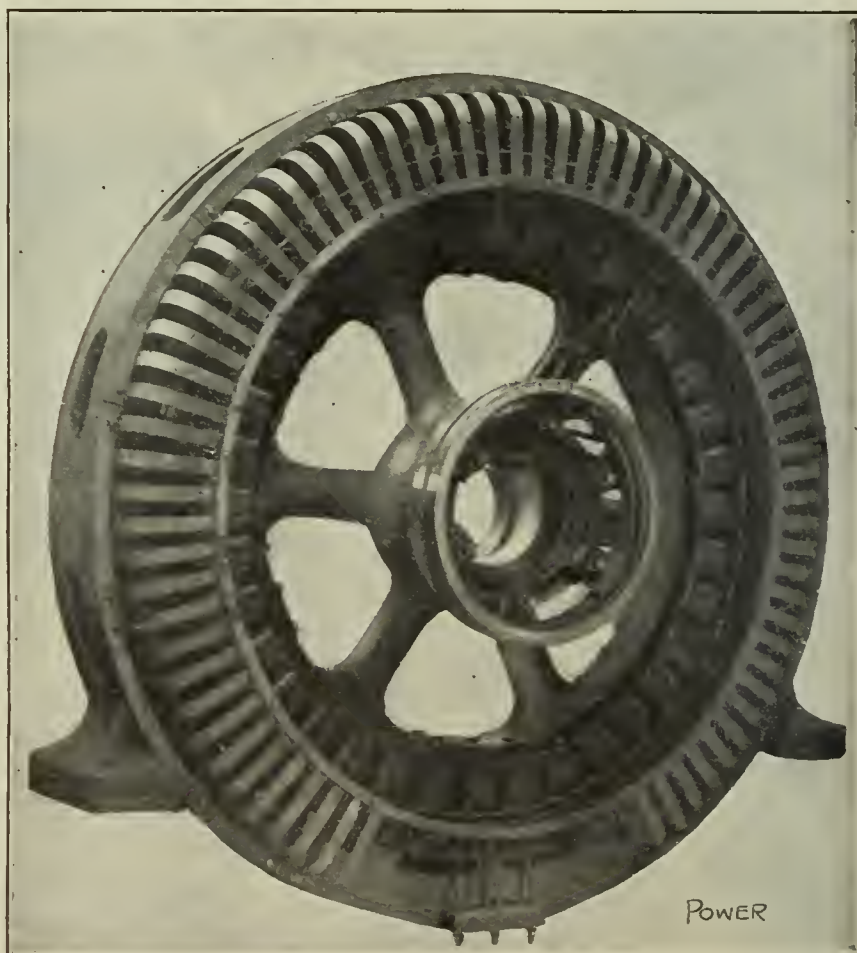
ALTERNATOR FOR DIRECT MOUNTING
